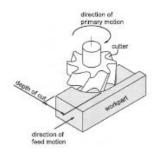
Partial face milling operation. The facemilling cutter machines only one side of the workpiece.
